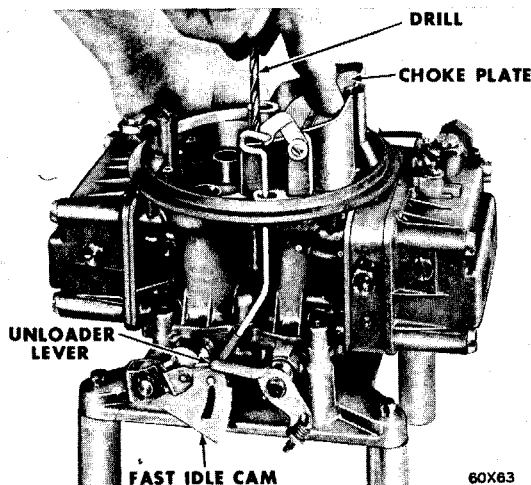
Choke Unloaded Adjustment (wide open kick)
